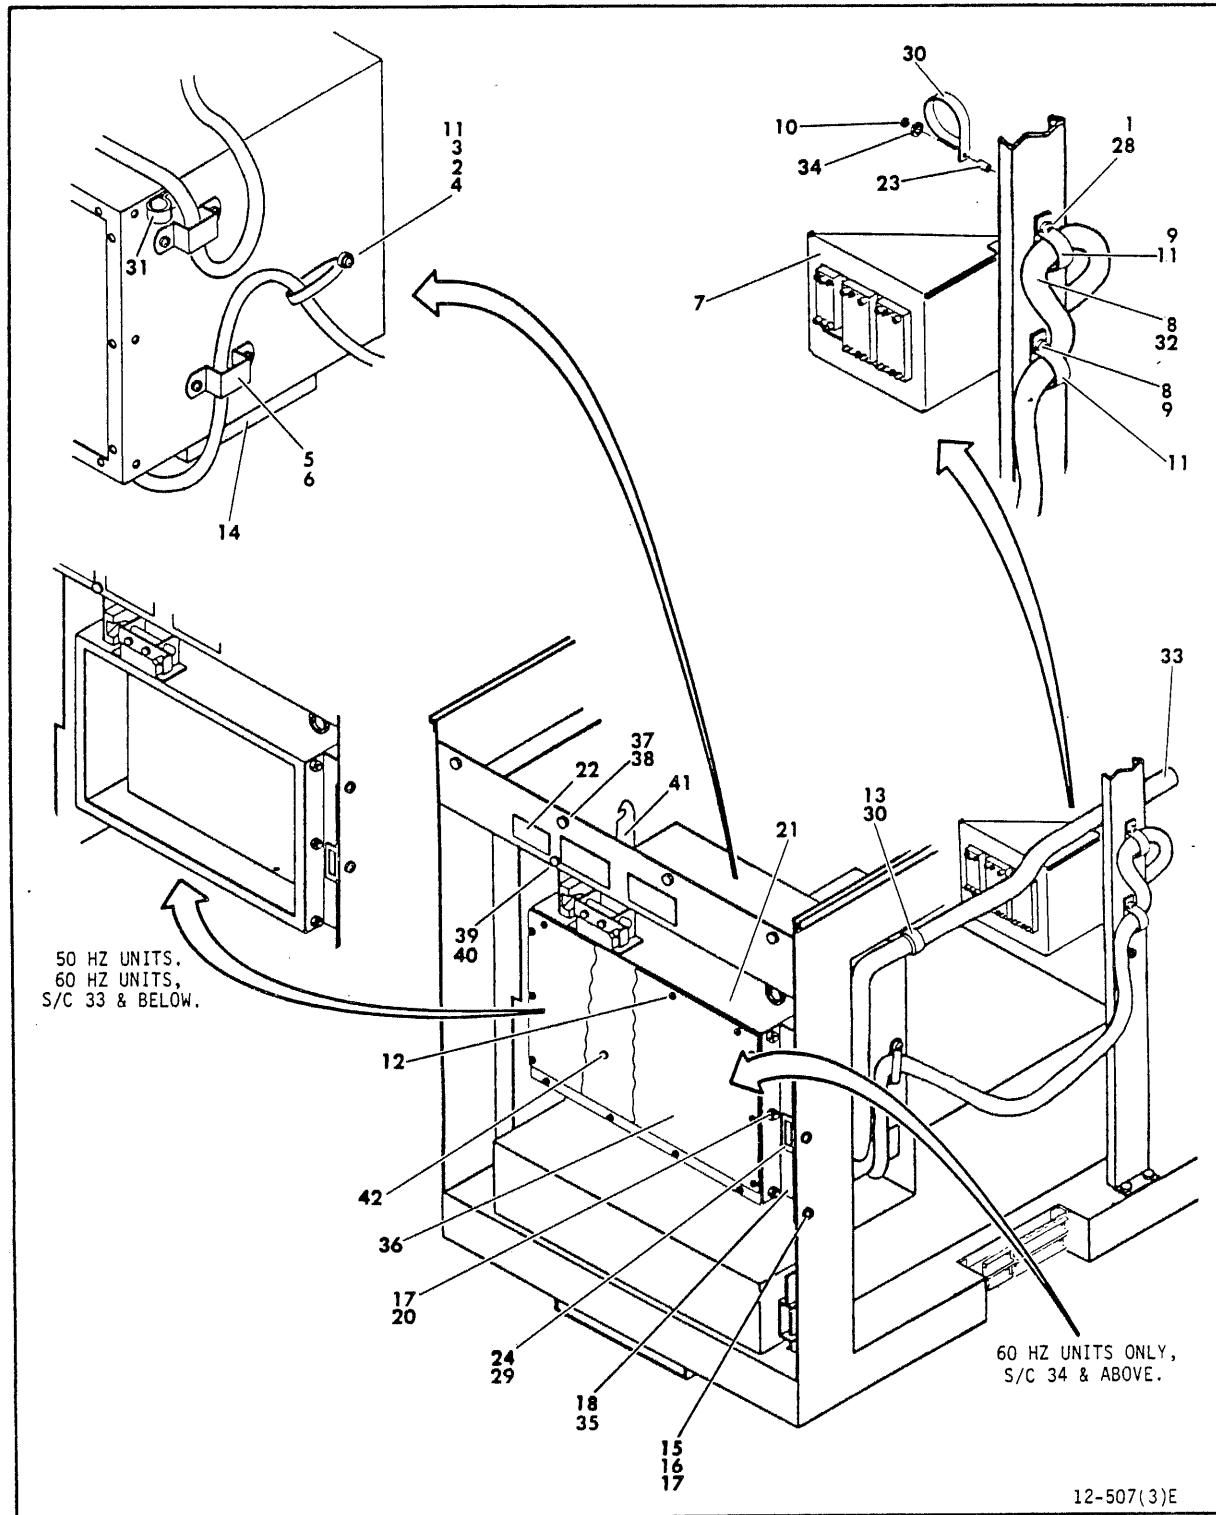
A-5. Final Frame Assembly (Sheet 3 of 3)
